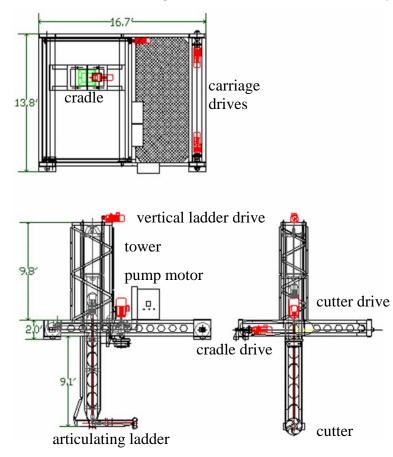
Dredge/tow carriage assembly drawing (dimensions in ft, divide by 3.28 for m).
